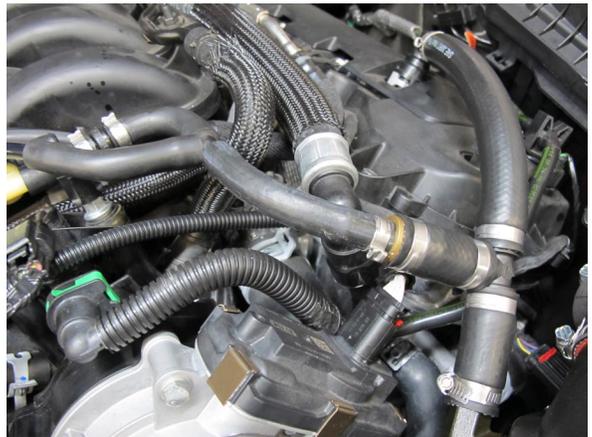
b: Driver Side PCV Hose Modification (Reference)
